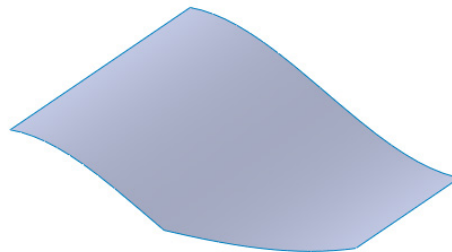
Untrimmed surface created by selecting the Connect endpoints radio button
